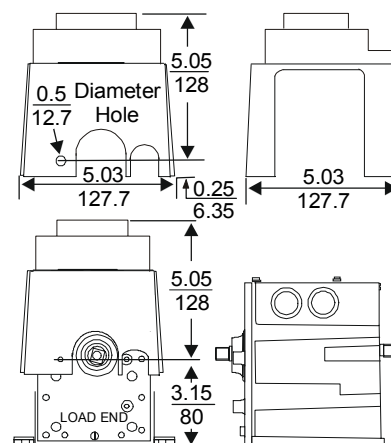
CVR83A-600R Weather Cover Kit, in. (mm)
